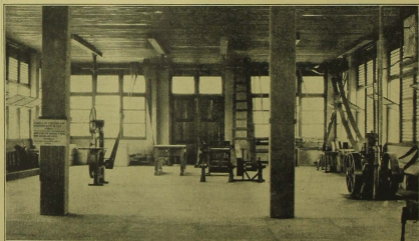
Plate VI. A good arrangement for machinery, with space for piling lumber while sawing and planing.
